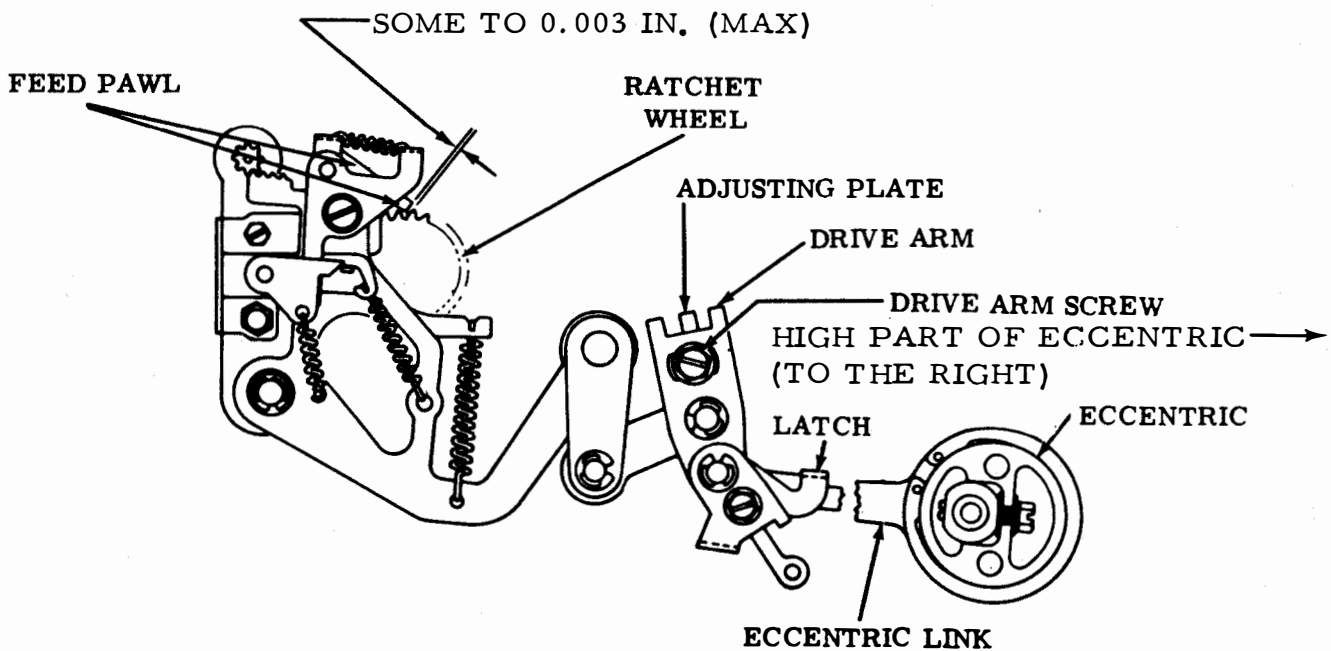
Drive Arm (Preliminary) (For Chadless Tape), Reperforator, Front View
